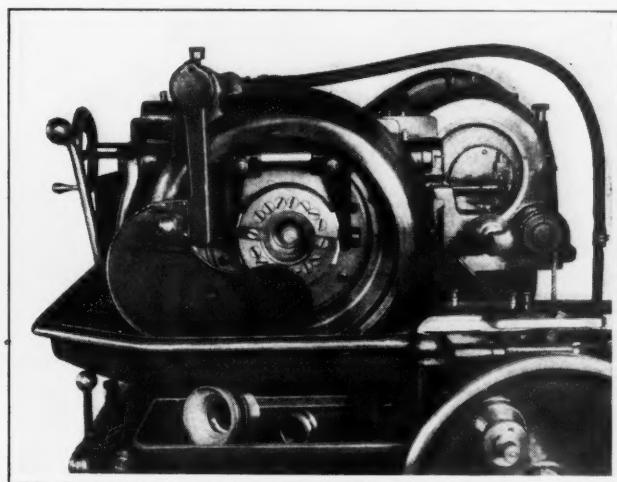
Close-up View, Showing the Wheel Enclosed by the Work-head
